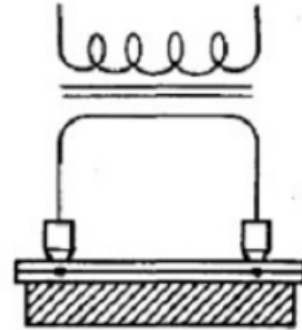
Schematic layout for series or parallel welding [7].
